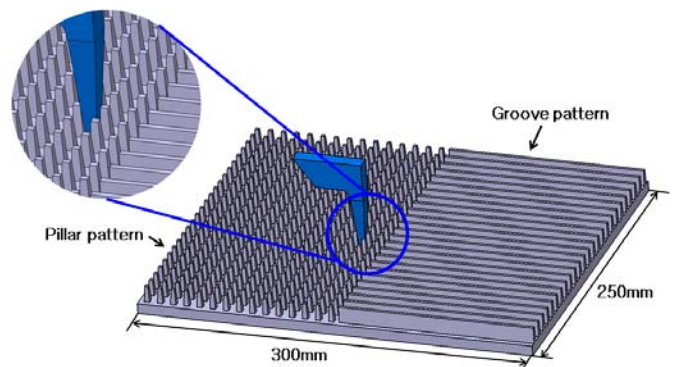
Schematic drawing of fabricating brass master by micro machining
